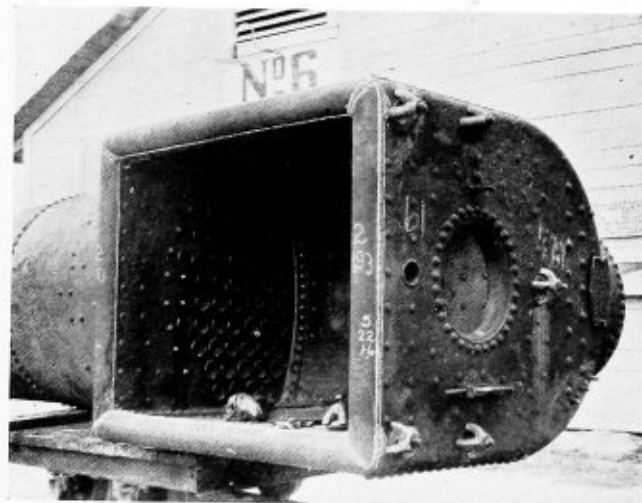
Portable boiler showing method of welding half round sheet to water leg
